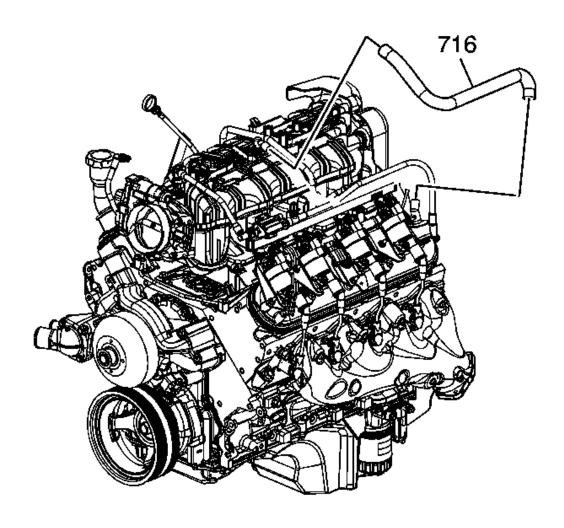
View Of PCV Dirty-Air Hose Courtesy of GENERAL MOTORS CORP.
